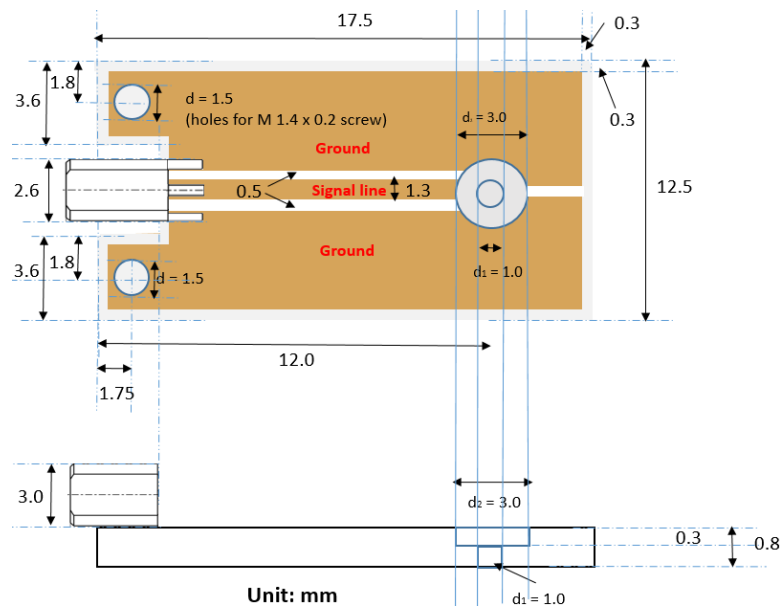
Schematic design of the PCB. Top panel: top view; bottom panel: side view.
